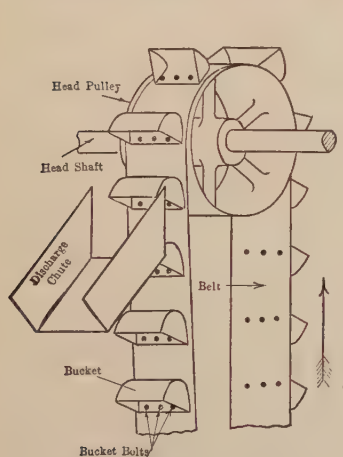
Head of Centrifugal Discharge Belt Elevator.
